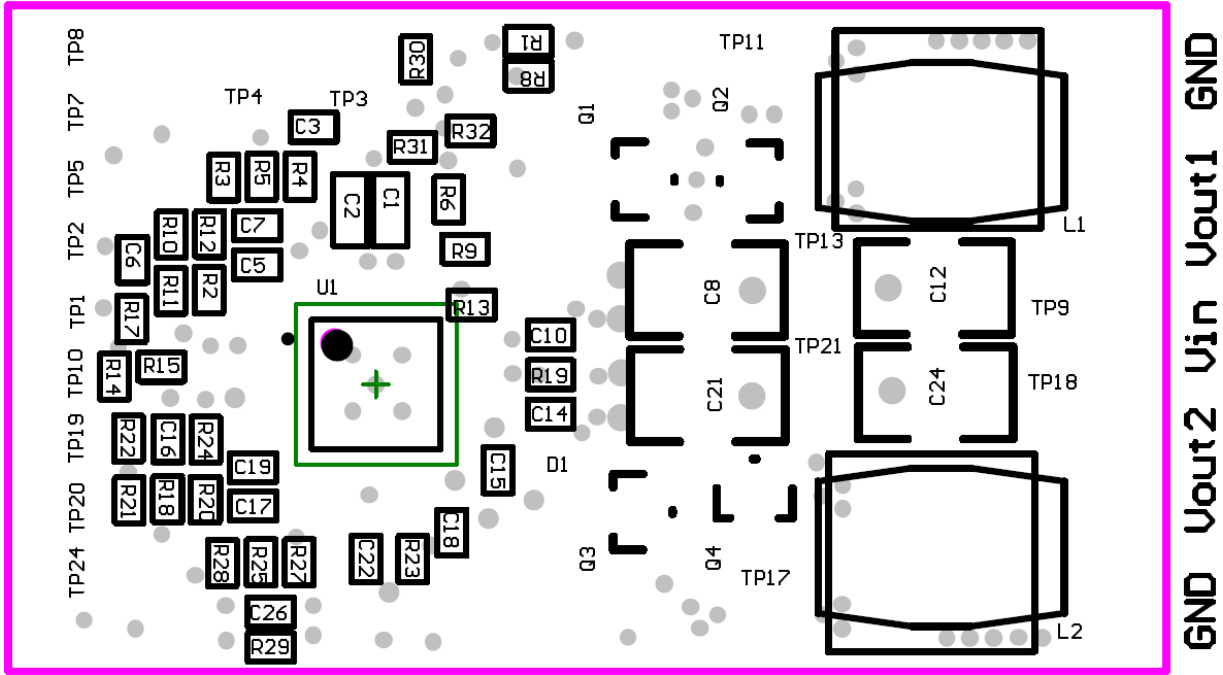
Top Assembly Drawing for 1829 Evaluation Board
